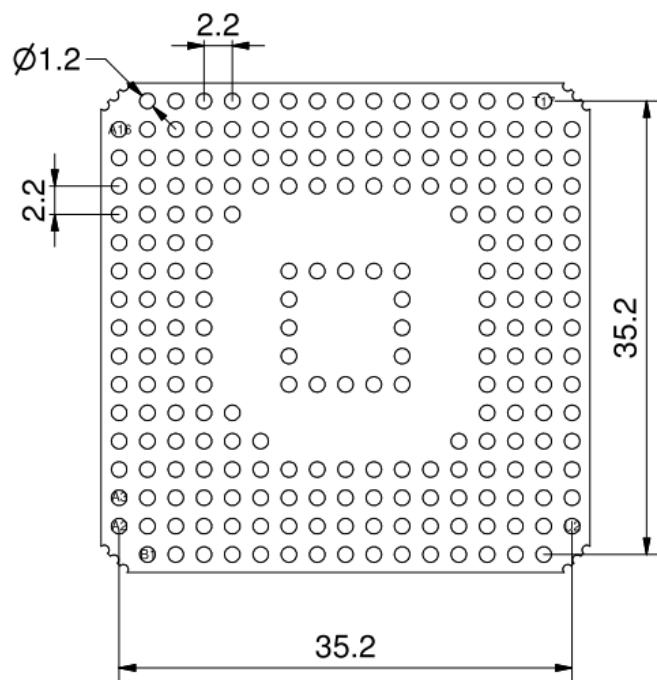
Dimensions, top view through TQMa6ULxL
